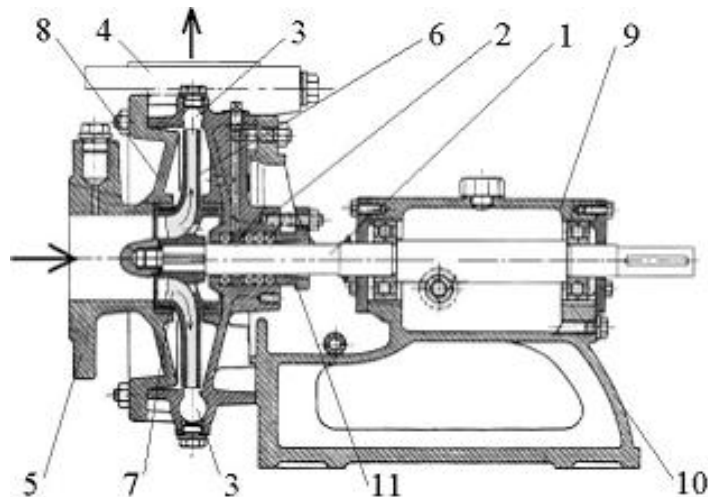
Centrifugal pump: 1-shaft ; 2-sealing system ; 3-volute chamber ; 4-discharge flange ; 5-aspiration flange ; 6-pump impeller ; 7-rotor blades ; 8-pump casing ; 9-bearing block ; 10-pump support ; 11-gland
